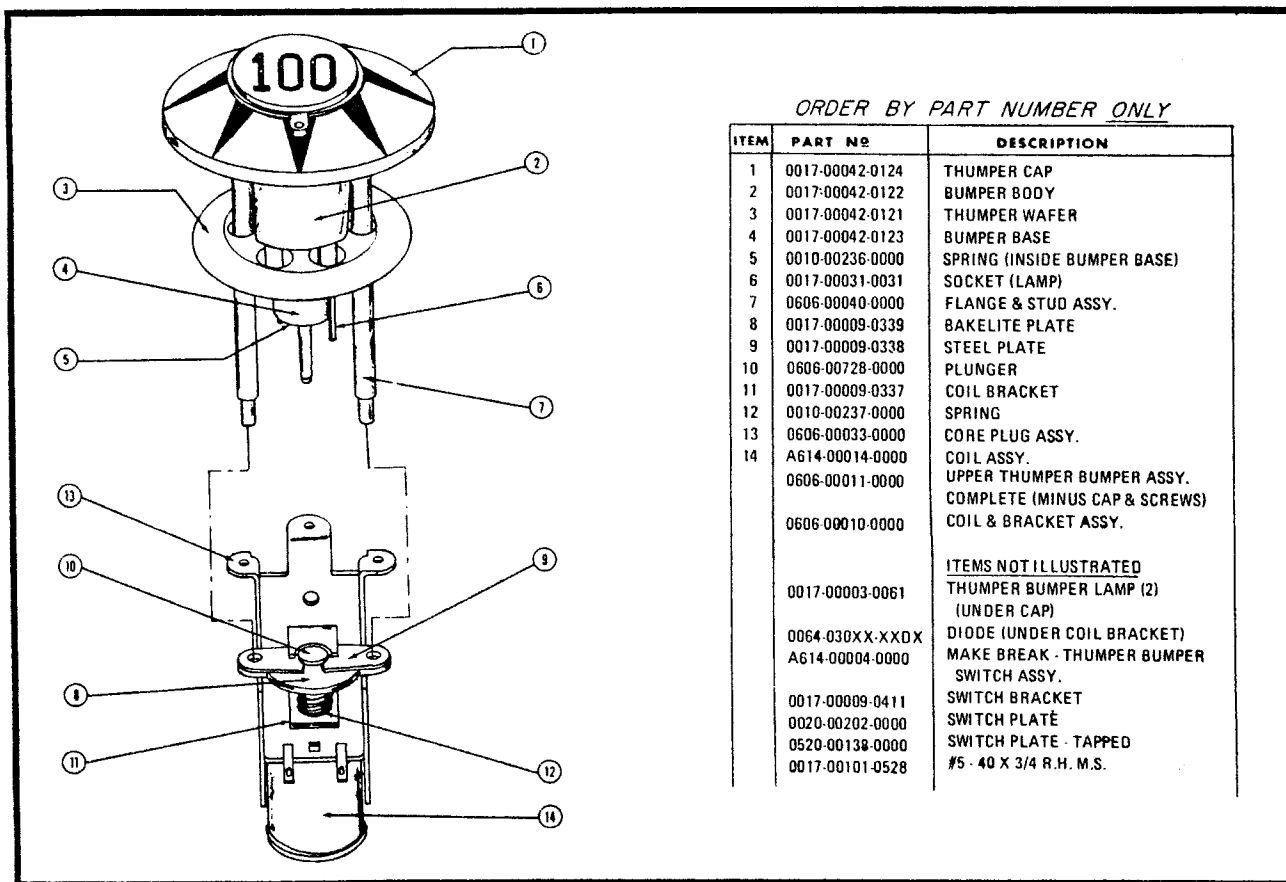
Exploded view and parts list of the thumper bumper and coil assembly.
